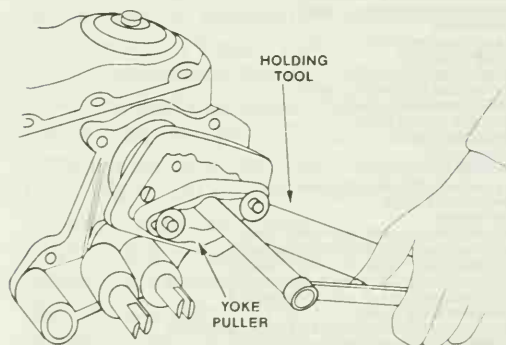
The yoke is removed with a yoke puller and holding tool.
